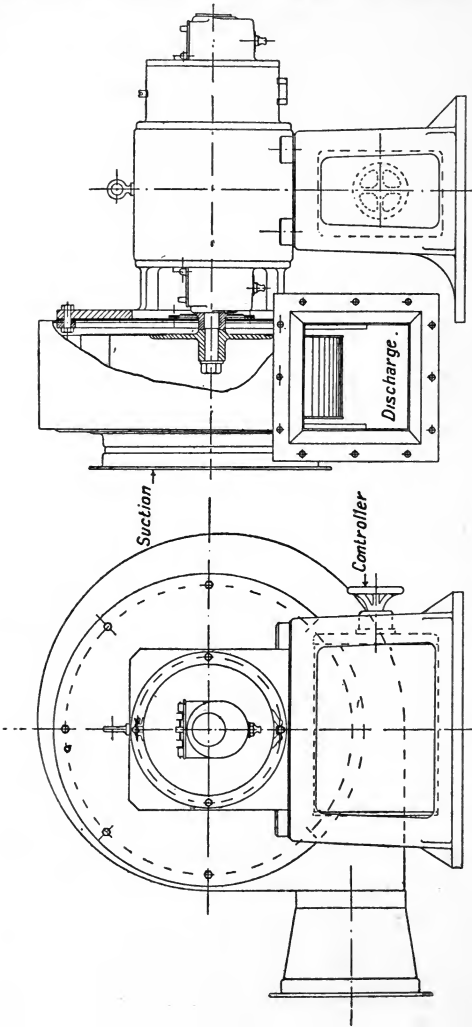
MOTOR DRIVEN "SIROCCO" FAN.
